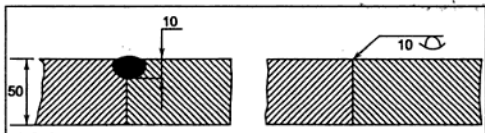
Indication of Vertical Depth of U Butt Weld
